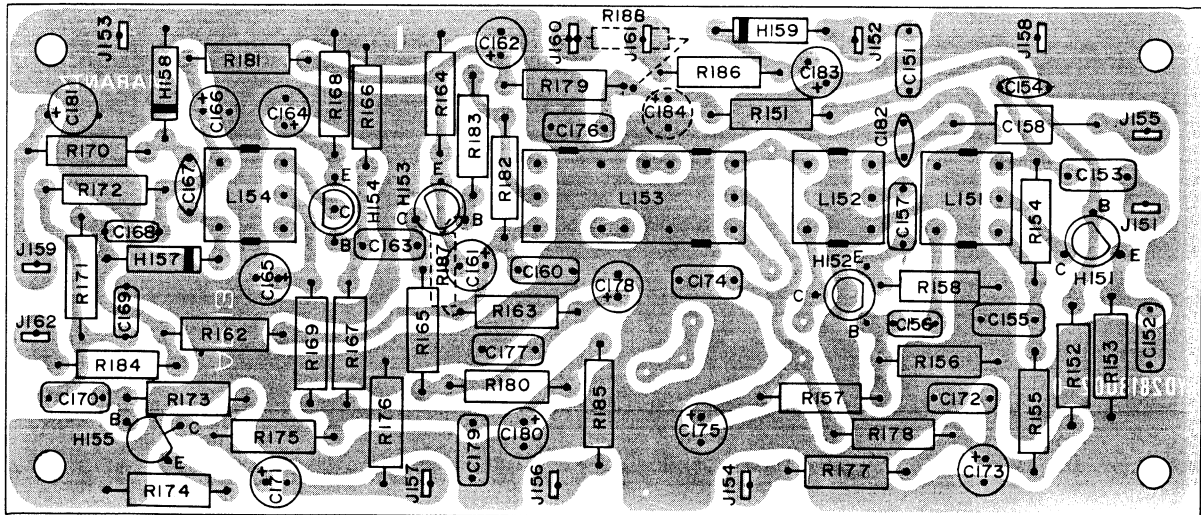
AM Tuner Unit Assembly P150 Component Locations
